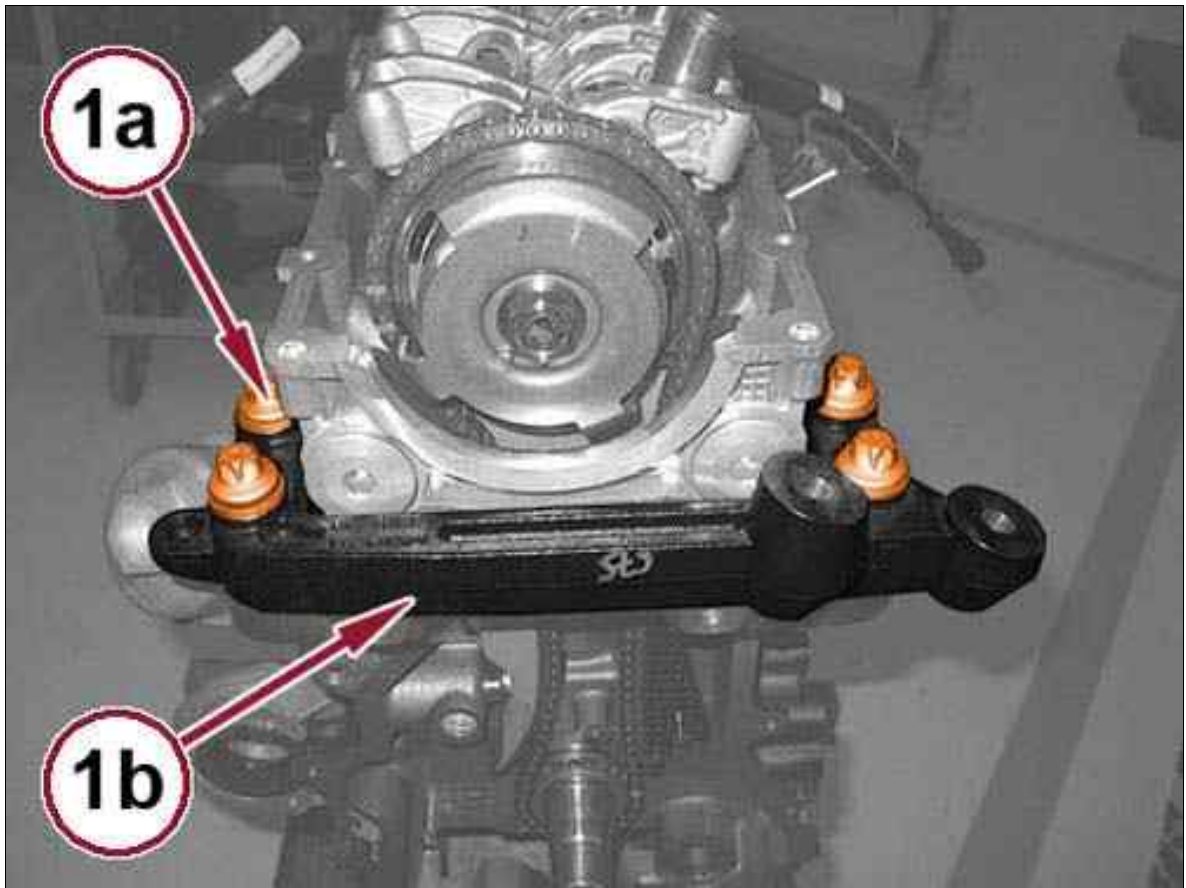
Centre Fixing Screw For Timing Drive Chain Cover & Gasket
